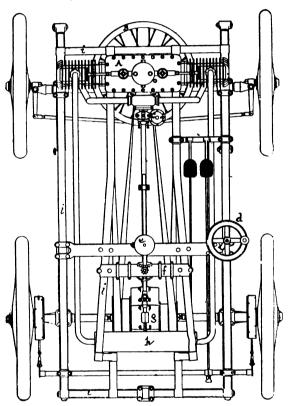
PLAN OF THE TURGAN-FOY VOITURETTE.
